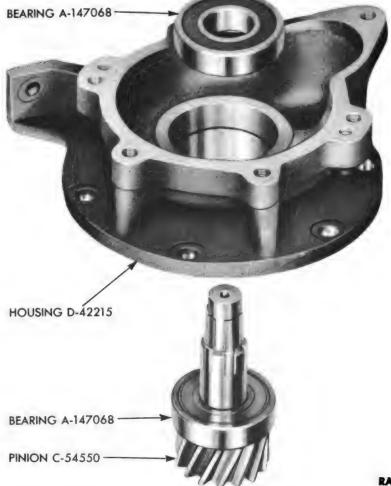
Traversing Mechanism Pinion Assembly - Exploded View
